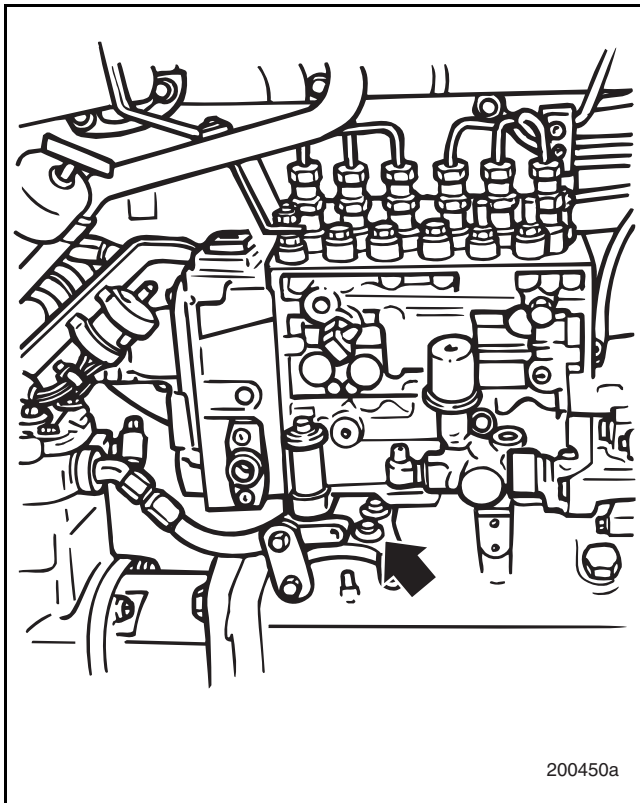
Support Bracket-to-Cylinder Block Capscrews
